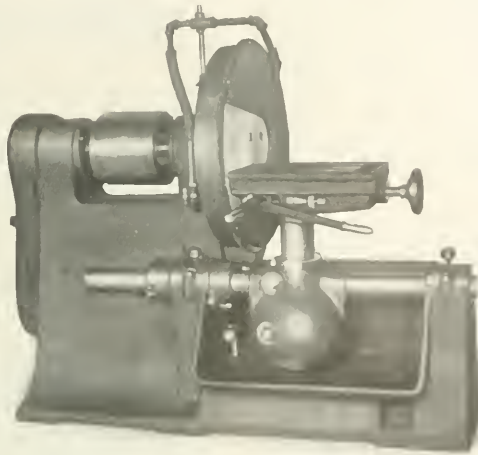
Front View of Gardner No. 50 Disk Grinder
